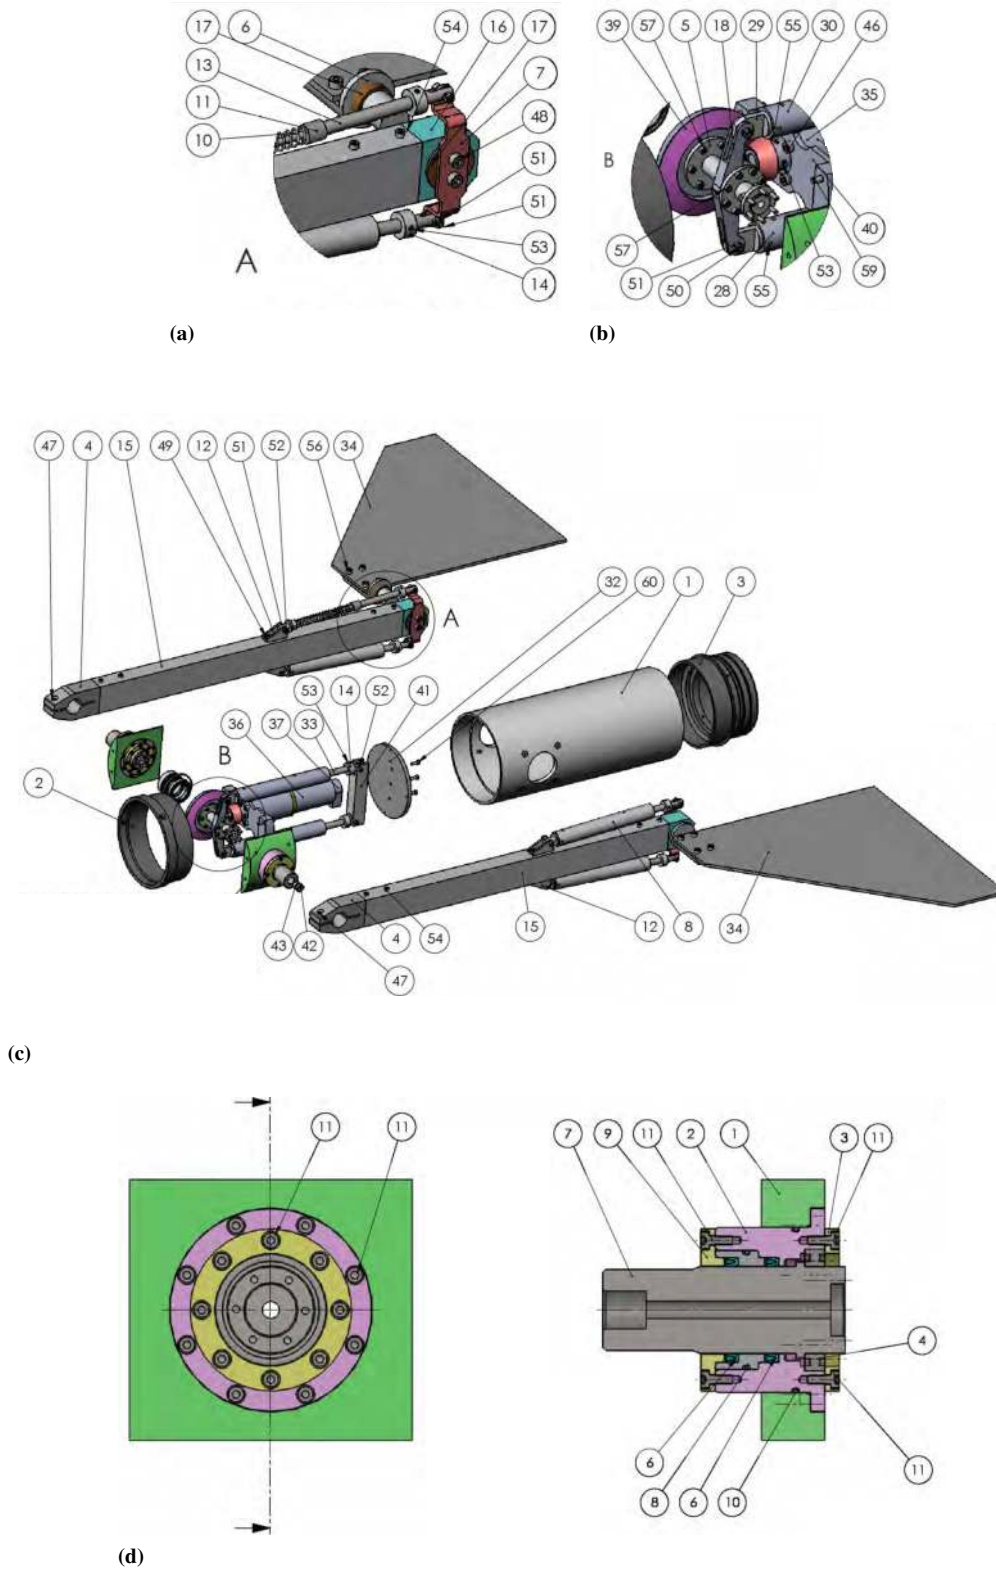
CAD drawings of the WAVE module (courtesy of GraalTech). (a) Close up of the arm-wing connection. (b) Close up of the joint-motor connection. (c) The whole WAVE module main CAD drawing. (d) Close up of the payload tube passage for the wet-dry transition.
